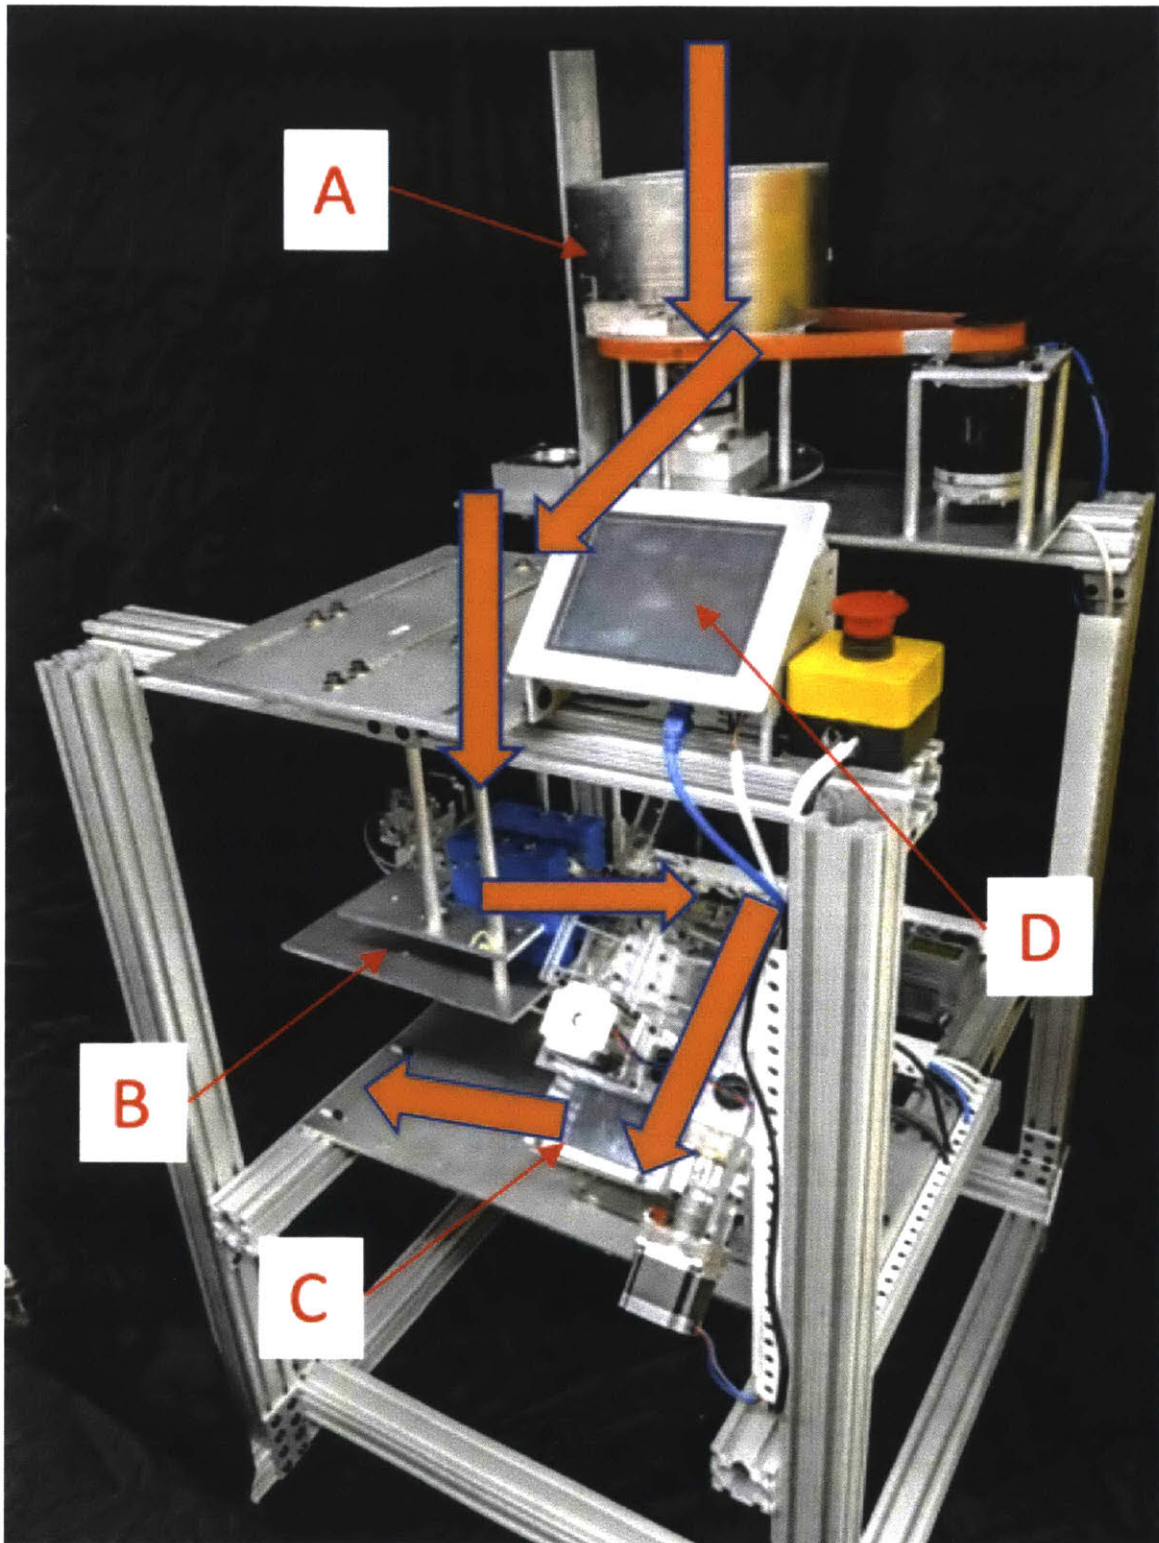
Functional automated packaging machine prototype. A) Vial acceptor and orienter. B) Transfer line feeder. C) Vial placement mechanism. D) Control panel. Note: Orange
